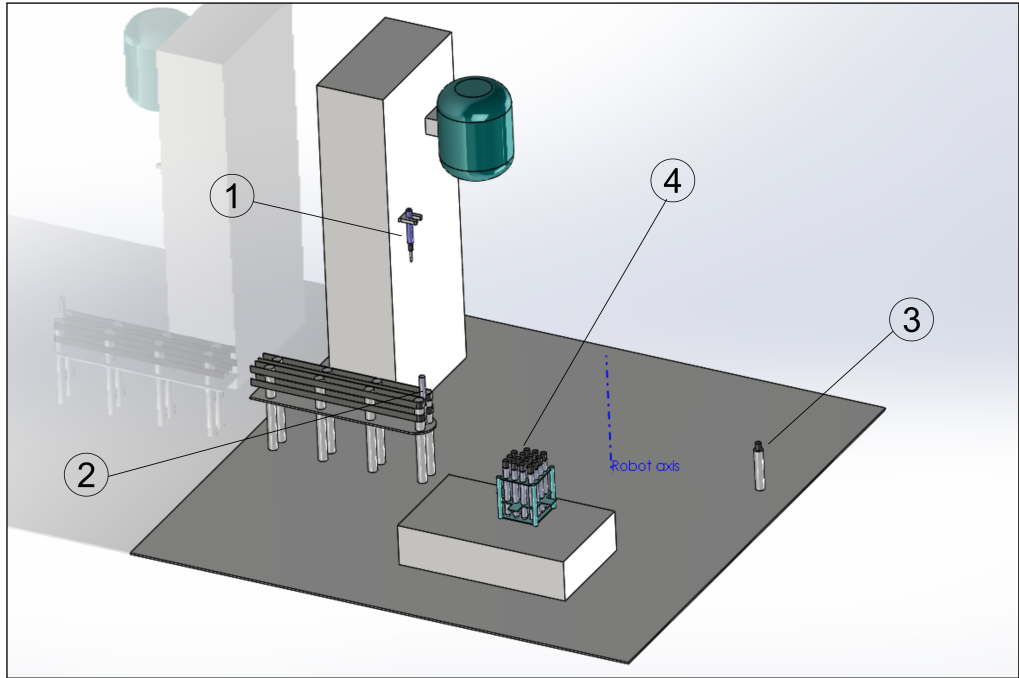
3D model of assumed workplace scenario: (1) product injector lance, (2) test tube body, (3) test tube cap, (4) blister of filled test tubes.
